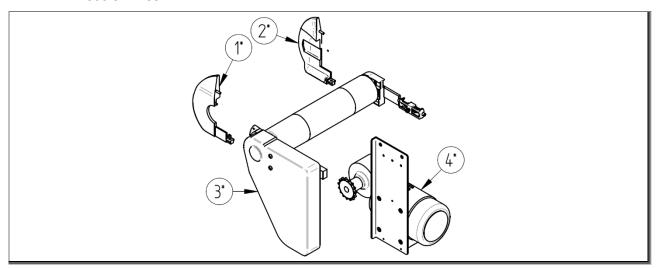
Parts list: External drive unit (positioned underneath) - position of drive unit 14 - ZZ.900.0144.00
